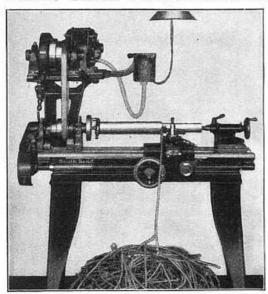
9-inch Junior Lathe Equipped with Silent Chain Motor Drive
